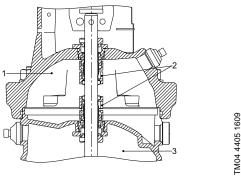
CR 10 to 20 with back-to-back seal arrangement
